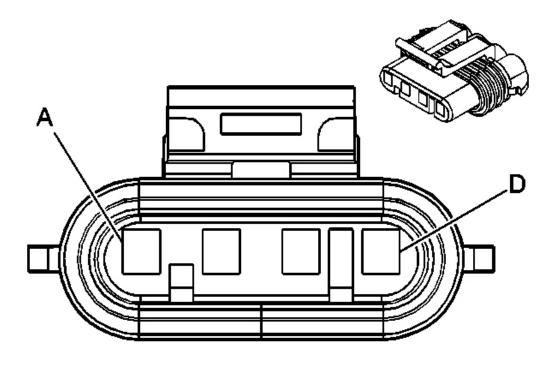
Generator Connector End View Courtesy of GENERAL MOTORS CORP.
